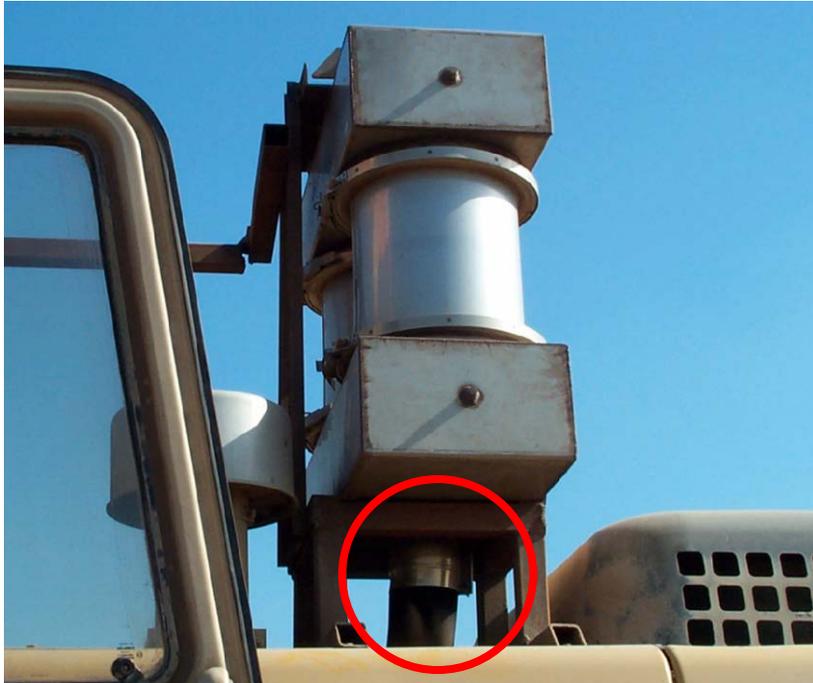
Stainless Steel Clamps Replace Welded Exhaust Installation Method
